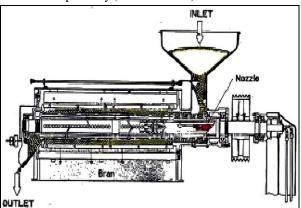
Sketchmatic diagram for the friction type milling machine.
